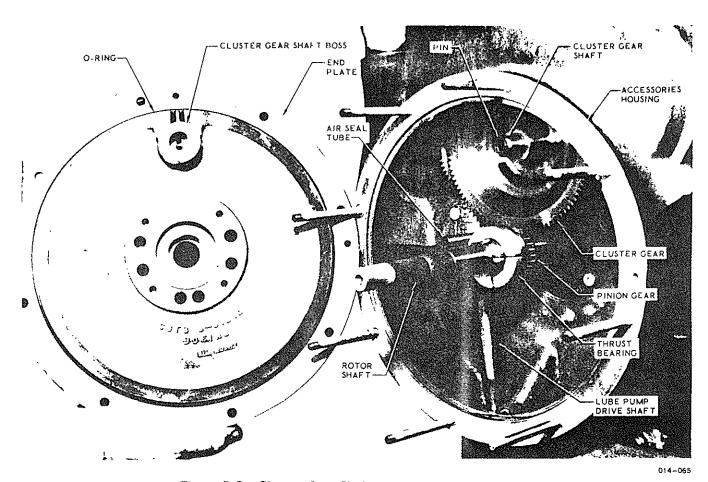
Cluster Gear Shaft and End Plate Alignment
